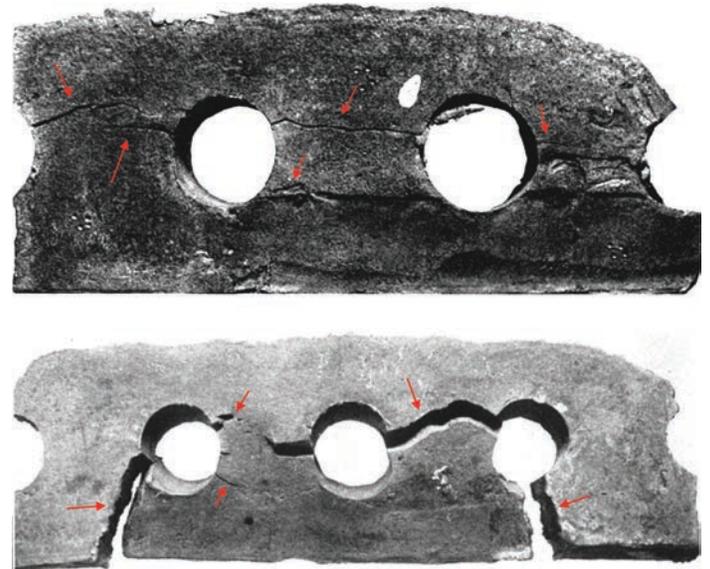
Photographs of boiler plates exhibiting caustic stress-corrosion cracking (arrows). Source: Ref 5
